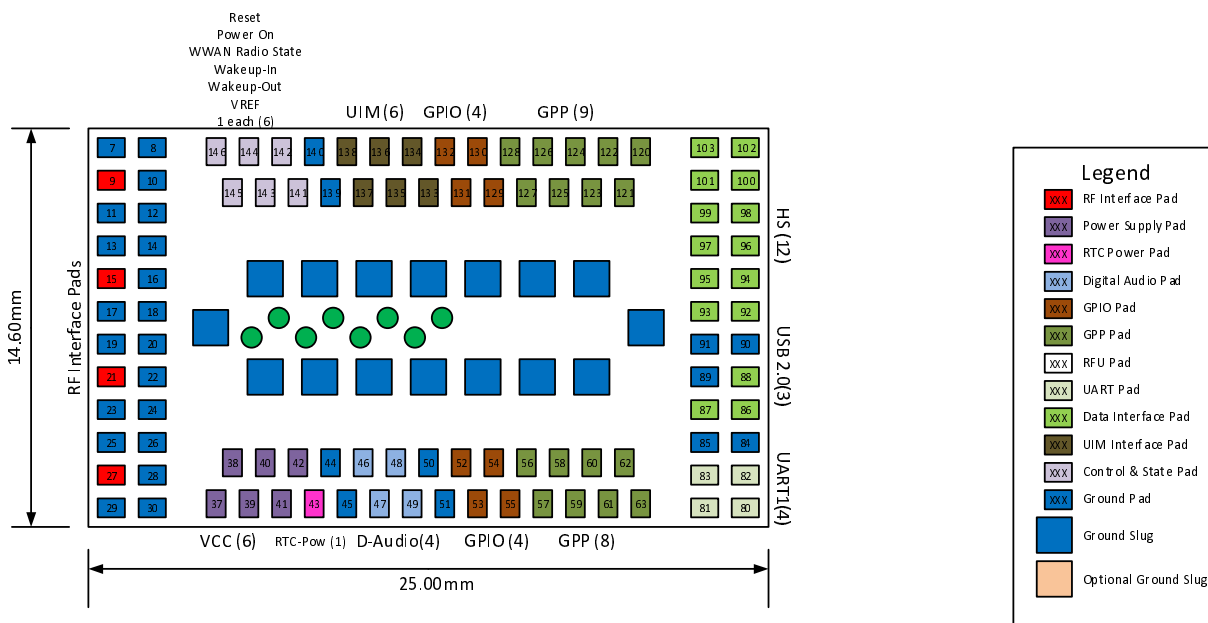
SMT2515 physical form factor (365 mm<sup>2</sup>), dimensions, pad numbering and placement
